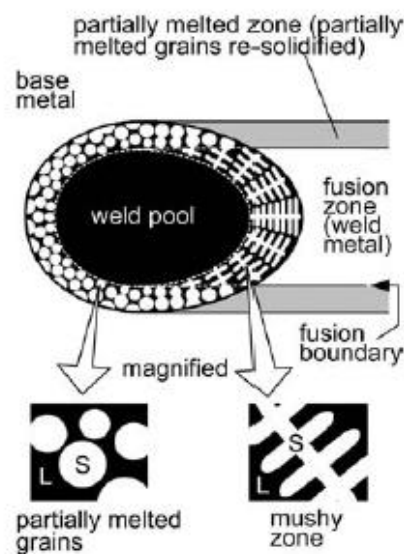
Partially melted base metal grains around the weld pool of an alloy during welding [32].
